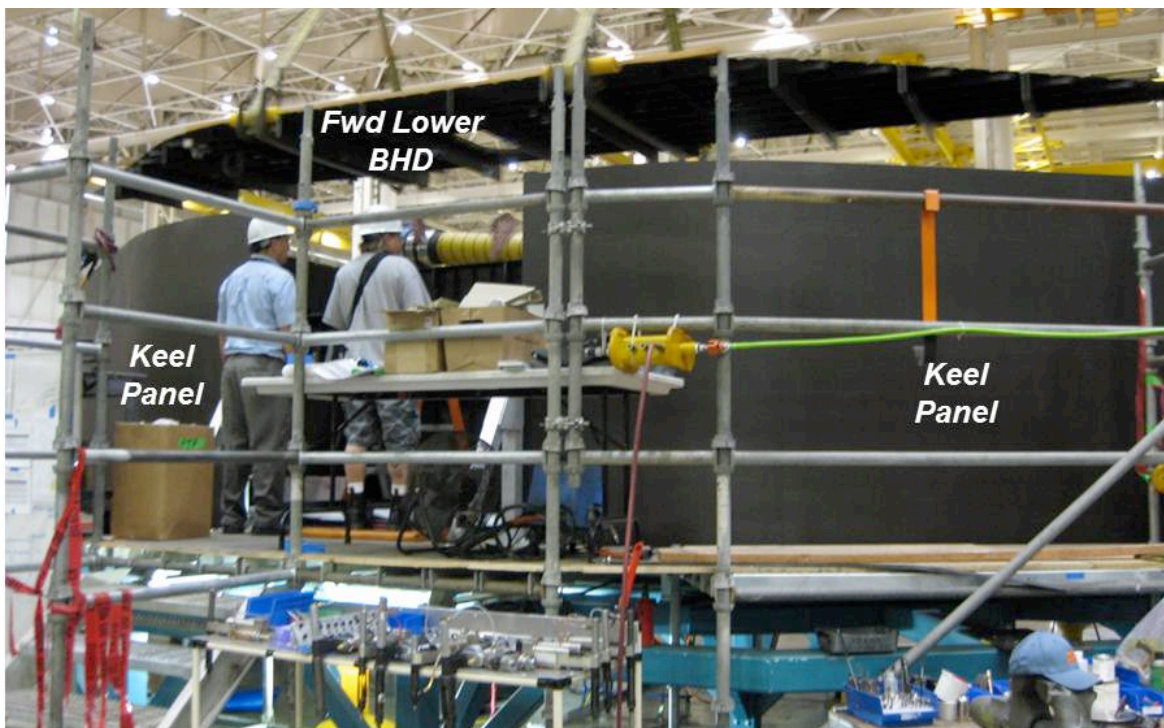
Lower Section Panels Lowered into Position at Box Assembly Site
